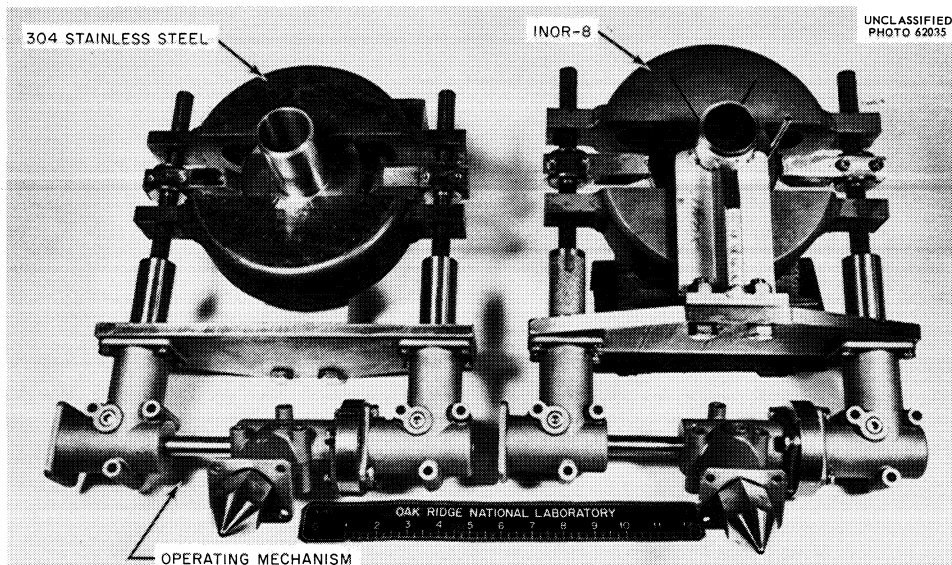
Flange Disconnect Assemblies for Sample Transfer Tube.
